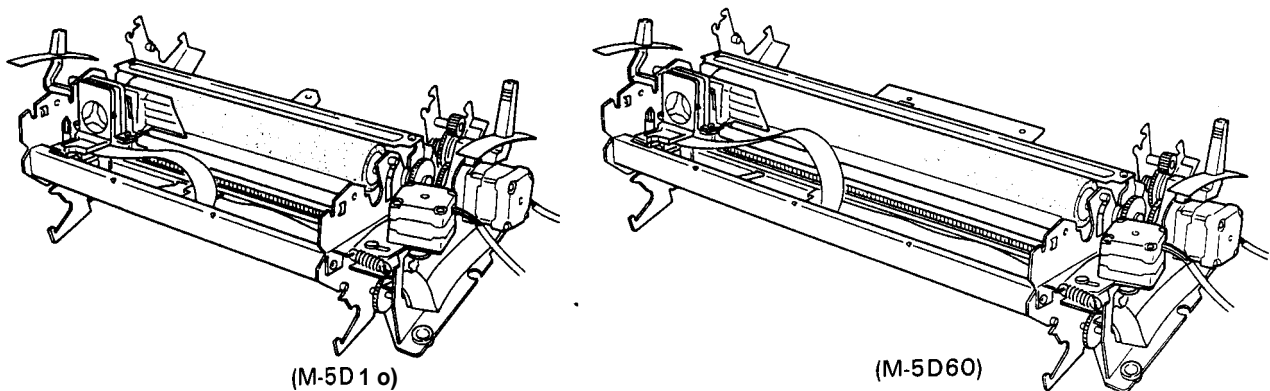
M-5 D10/5D60 Printer Mechanism
